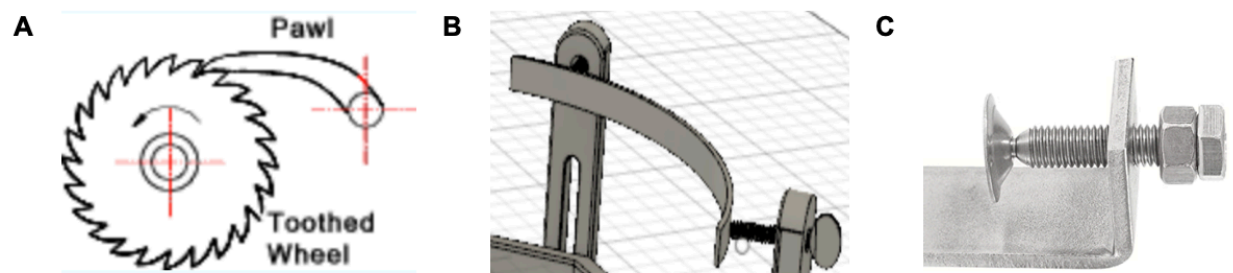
Alternative Tightening Mechanisms for Novel Headframe. (A) The ratchet mechanism, commonly found in bicycle helmets, is composed of two straps being pulled together by a toothed-wheel operated by a knob. (B) Front head-brace used to secure the head by holding the front and back in place securely. (C) Screw-and-nut tightening mechanism used in a C-clamp. The screw can be adjusted to go farther in or out, and the nut is tightened against the hole to secure the screw in place.
